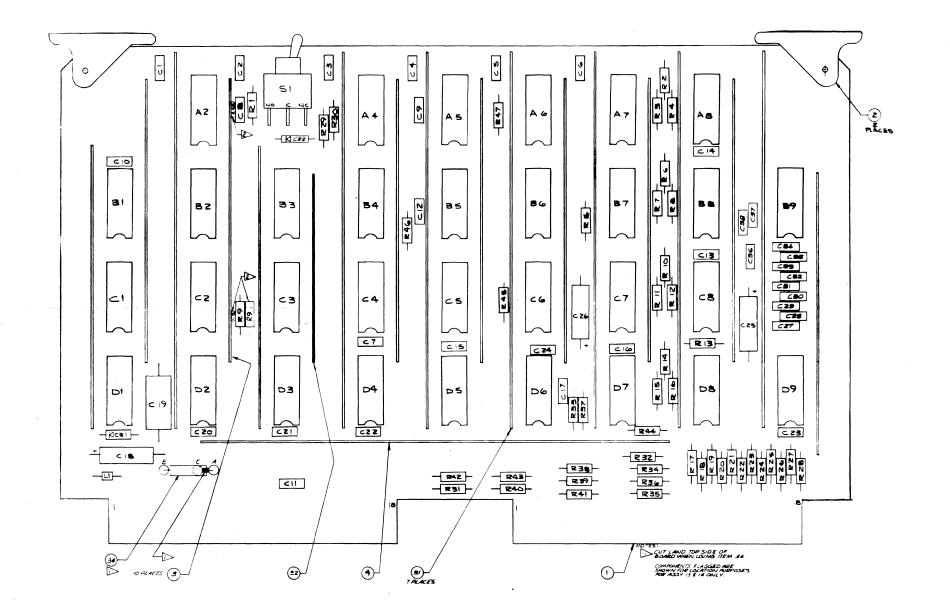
Assembly Diagram, Control Card (Dwg. No. 1040619)
